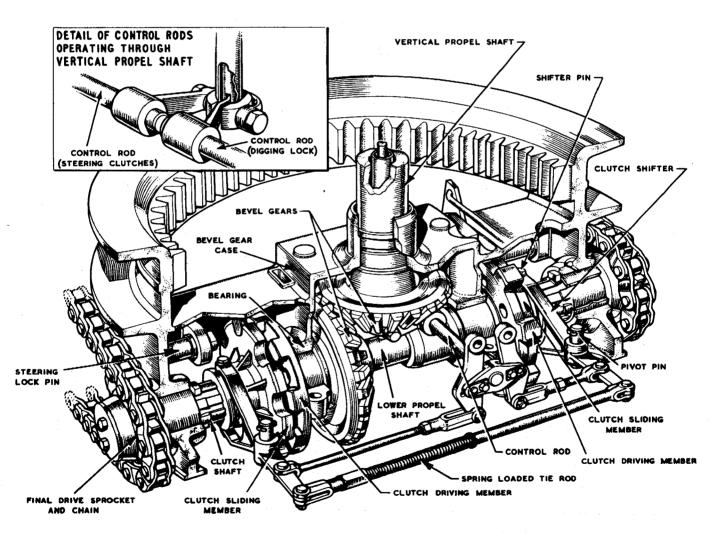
Part Sectioned Truck Frame showing the Propel Drive.
